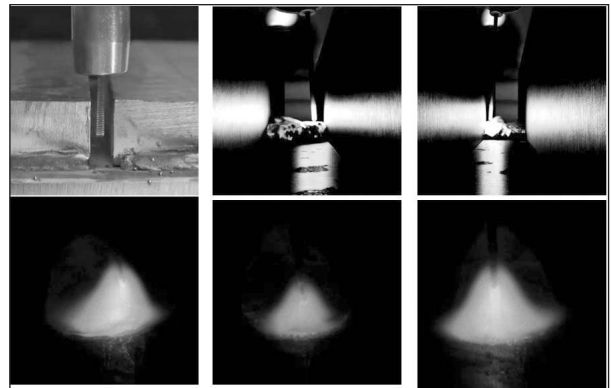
Rotating Arc technology; operation at rotating arc welding high speed video frame.
